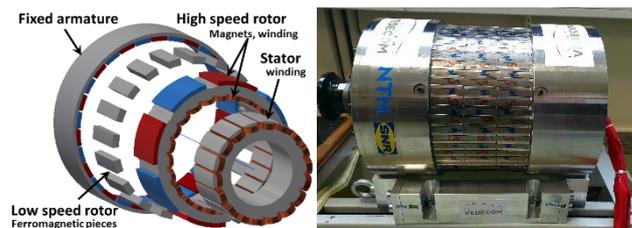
Magnetically Geared Induction machine: principle and prototype
